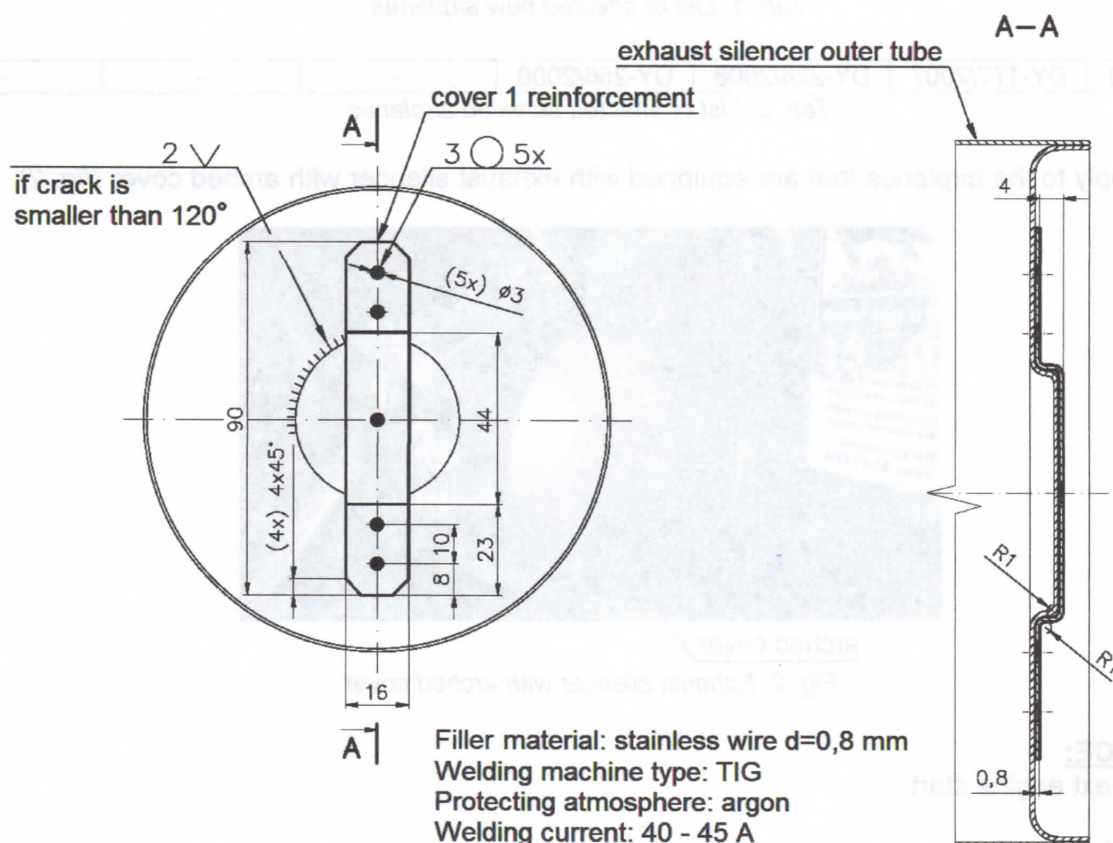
Crack welding and modification of right cover of exhaust silencer
